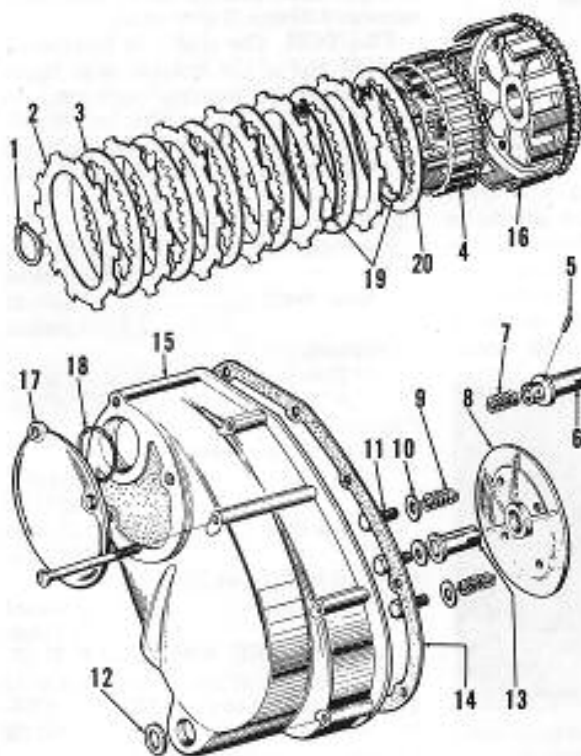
Exploded view of clutch assembly typical of CB and CL models. Six friction discs (2) are used on all models.
